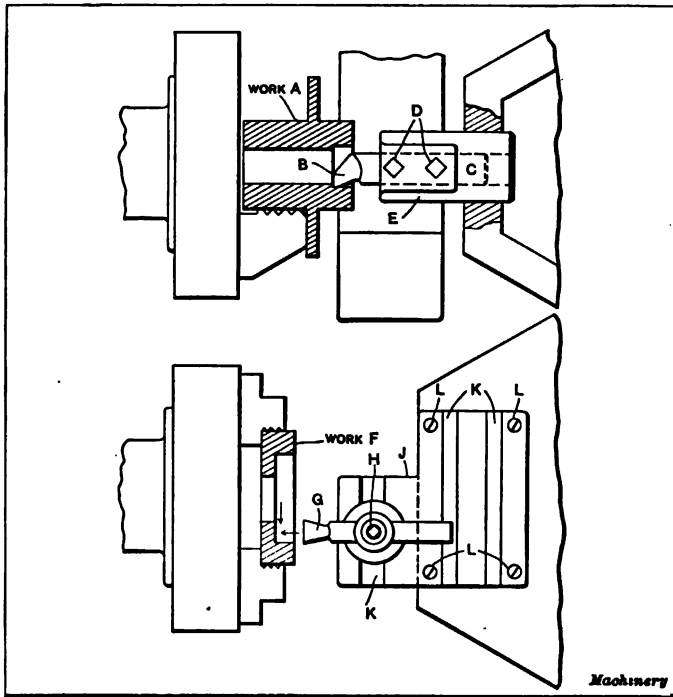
(Upper View) Single-point Starting Tool; (Lower View) Boring and Facing Tool
